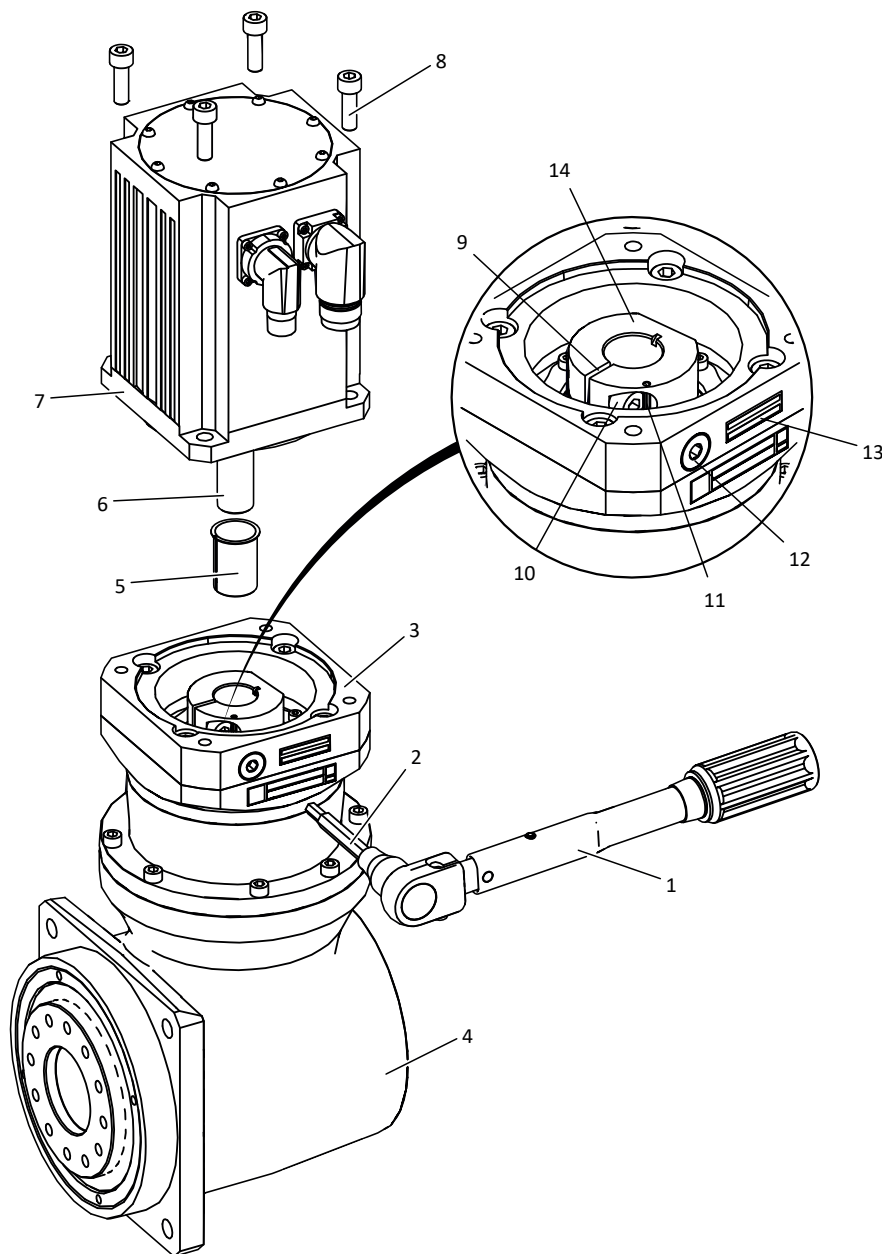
Mounting a motor on a KS right-angle servo gearbox with flanged shaft and motor adapter
